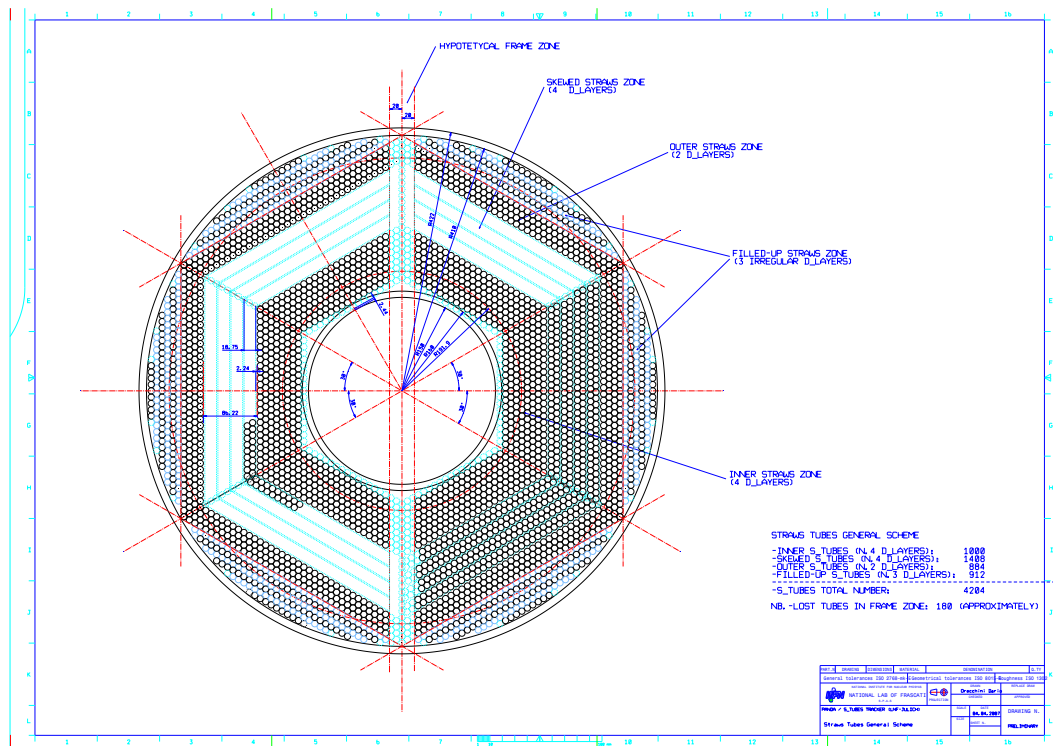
Cross section of the general layout of the Straw Tube Tracker. Not all straws are visible (blue marked region) for a better view of the details. CAD drawing by D.Orecchini (SSE-LNF, Frascati).
